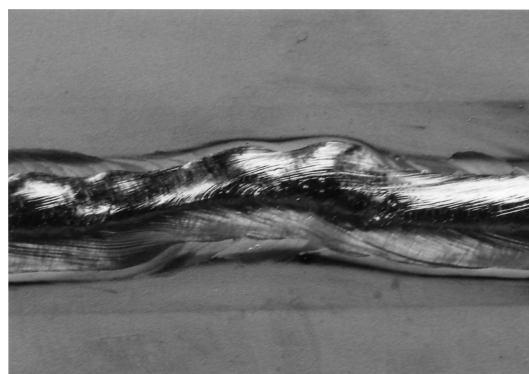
Wandering bead of MIG arc welding of titanium
